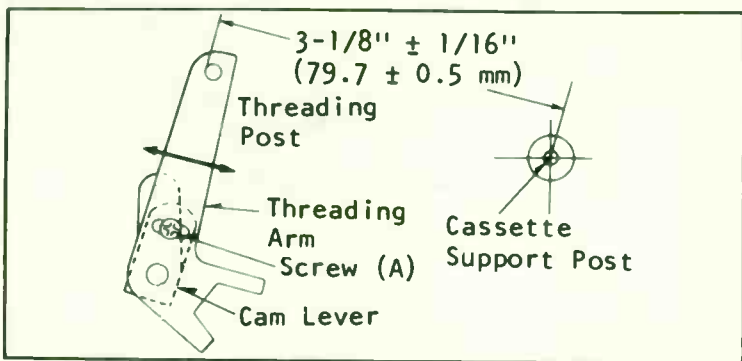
Threading post adjustment (courtesy of Magnavox).
